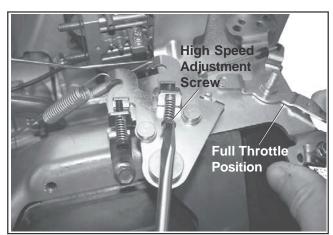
Setting High Speed RPM (Air Cleaner Removed for Clarity).
